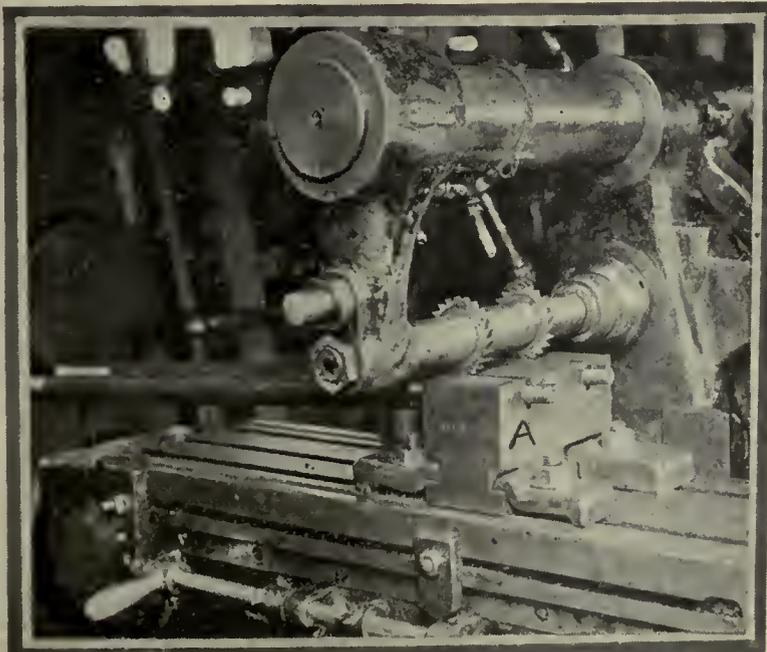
A JIG THAT REQUIRES NO HOLDING BOLTS.
